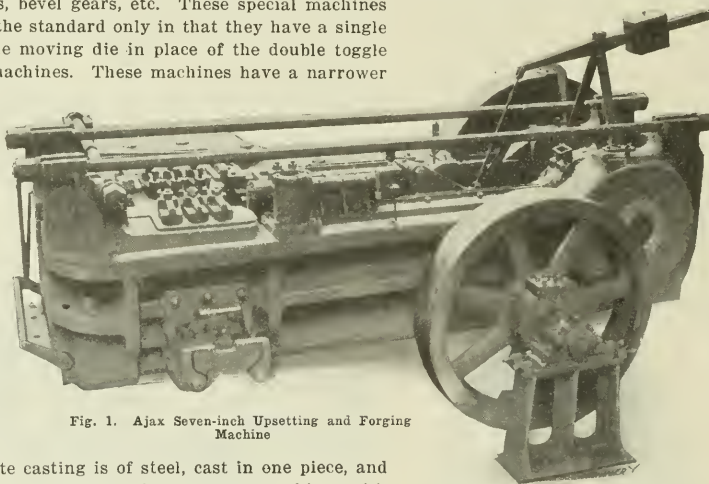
Ajax Seven-inch Upsetting and Forging Machine
